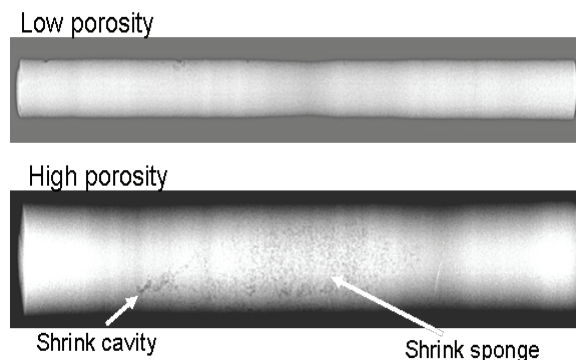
X-ray radiographs of porosity in two cylindrical castings.
